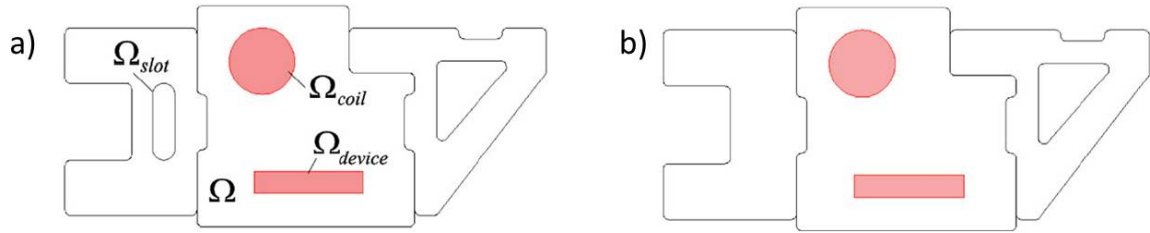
(a) A 2-D heat block assembly. (b) A defeatured 2-D block assembly. Par Gopalakrishnan et al. [25]
